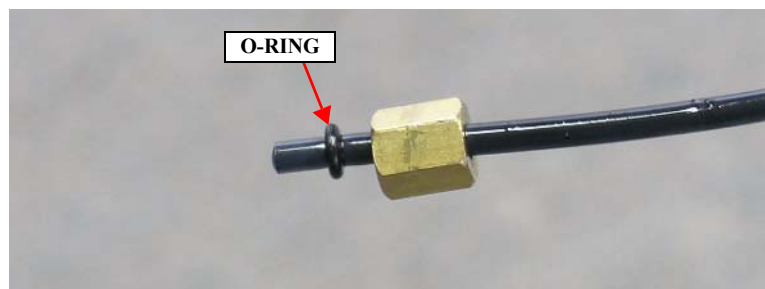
Reinstalling the TUBE, SUPPLY, INK
